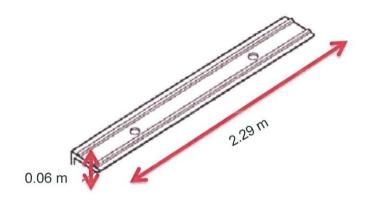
Rocker Source: architectjaved.com (n.d)
